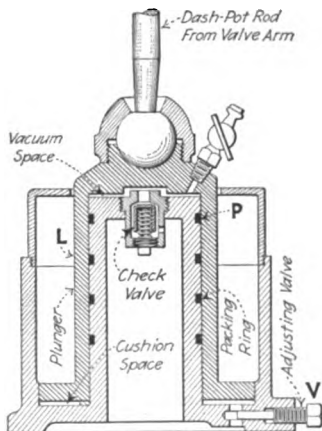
Showing inverted vacuum dash-pot for Corliss valve gear.
